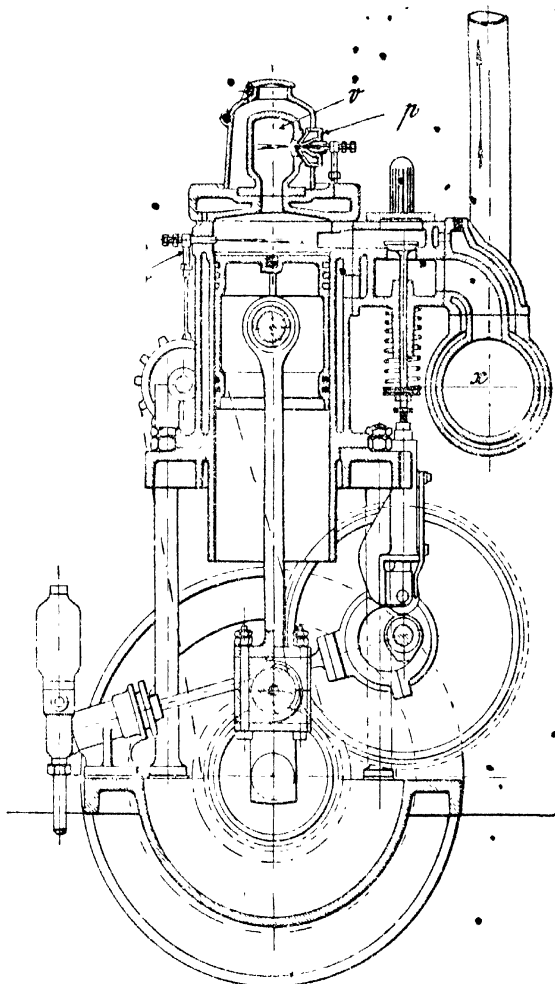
Sectional elevation of an Alpha 33 b h p. two cylinder marine engine showing vaporiser and injection nozzles for fuel and water.
